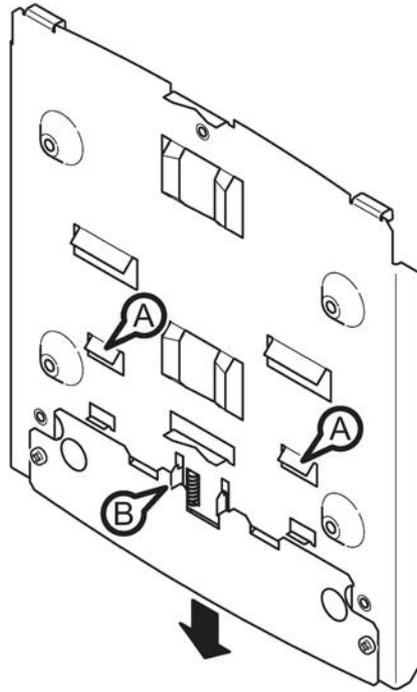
Mounting plate with fittings for DIN rail mounting
